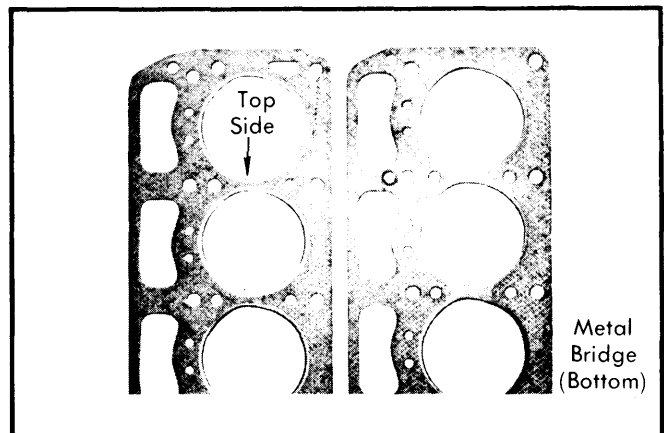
Install Cylinder Head Gasket with Metal Bridge Down (Toward Block)
